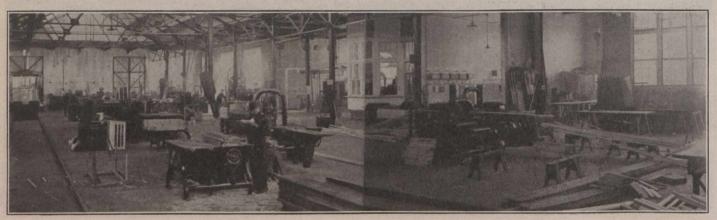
Interior View of Main Building, showing Armature Shop, with Machine Shop and Overhauling Space in Background.
